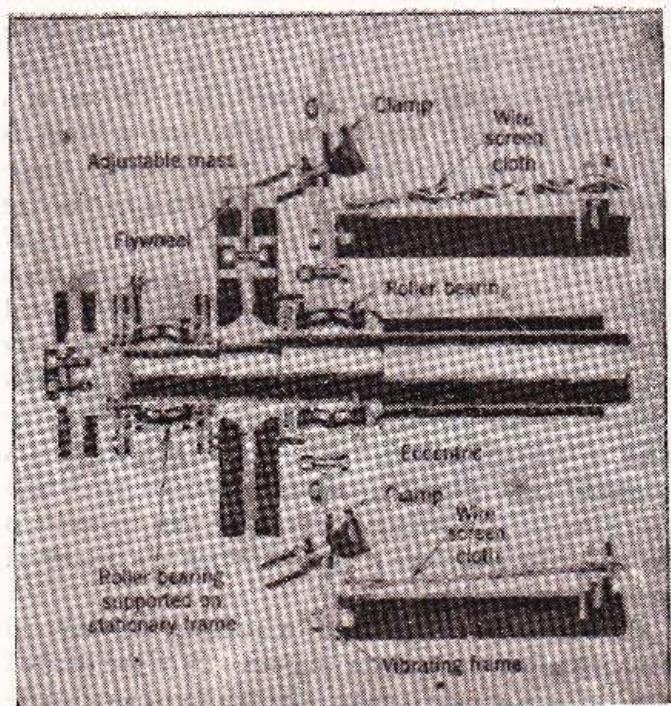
Sectional drawing of the mechanism of a mechanically vibrated screen. (*W. S. Tyler Co.*)
